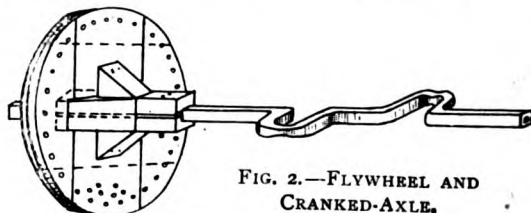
FLYWHEEL AND CRANKED-AXLE.
